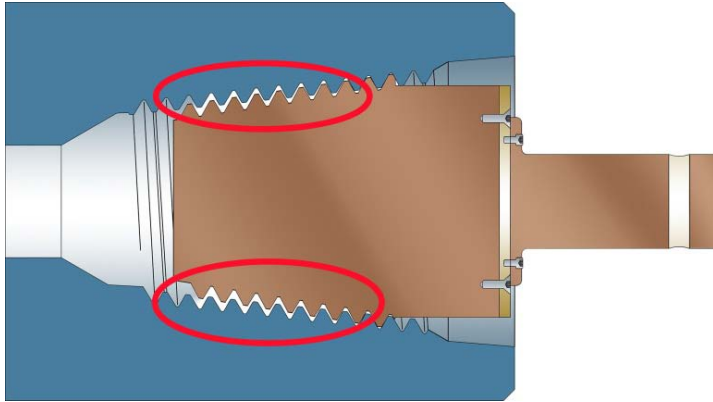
Box taper with a tolerance in the minus direction and the lack of thread interference is circled in red.
